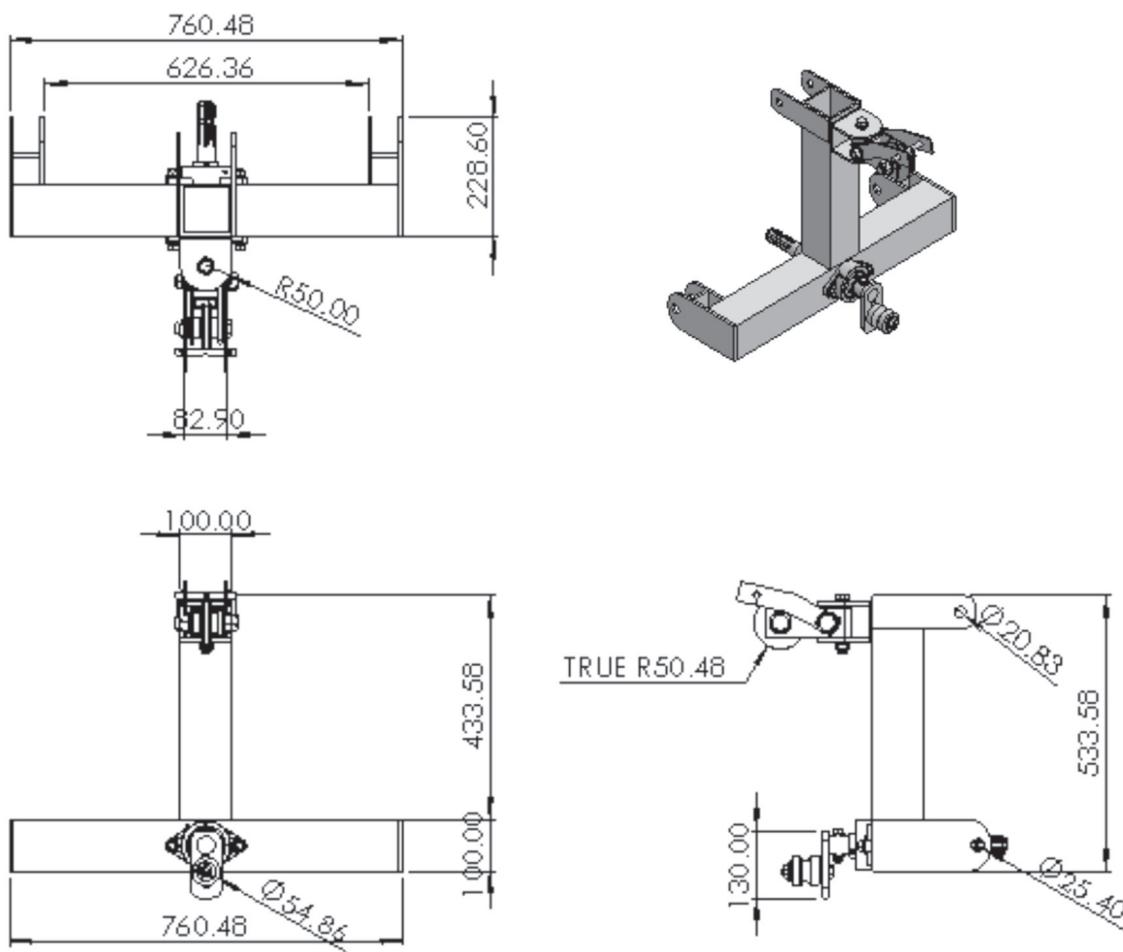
Blueprint and 3D drawing of the olive harvesting machine
